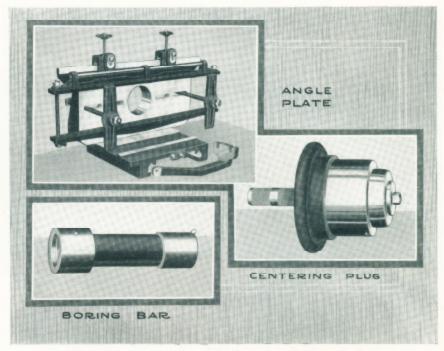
C-The Different Parts Which Make Up the Reboring Equipment.
